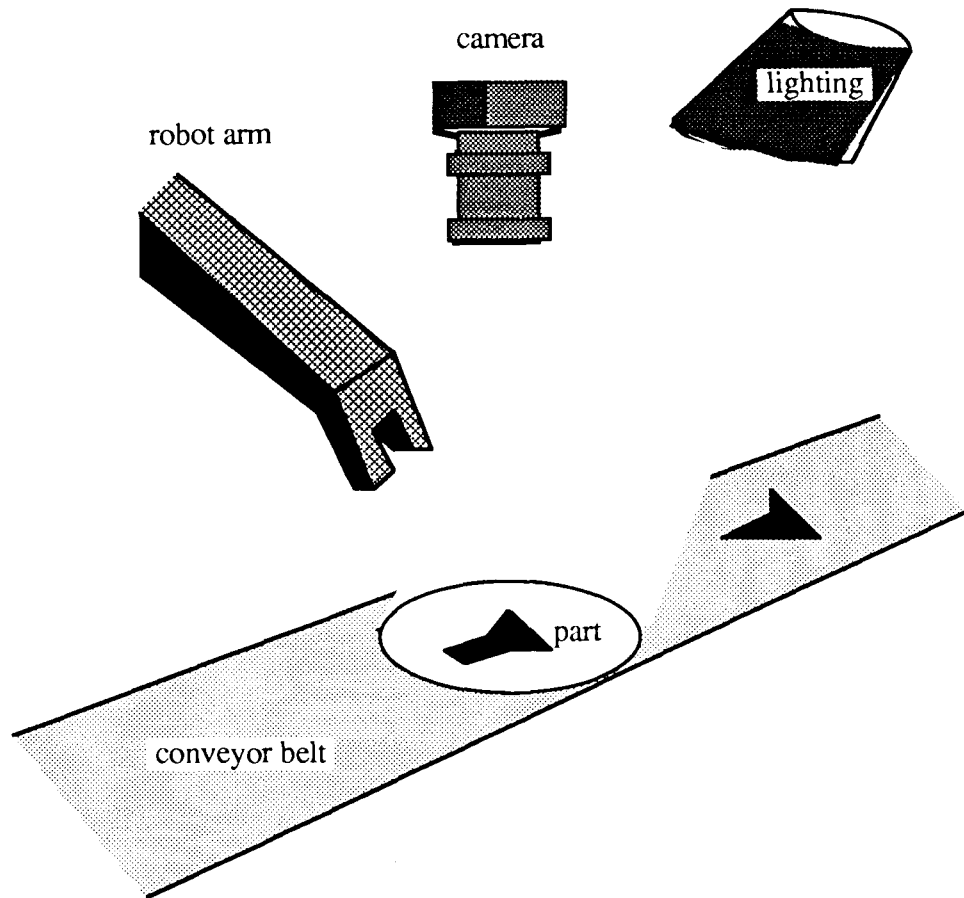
Robot Arm Picking Parts On Assembly Line
